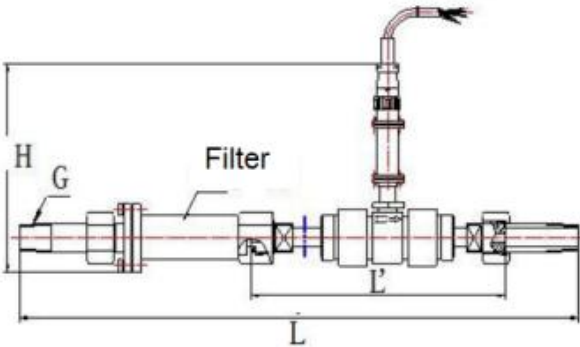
DN4~DN10 threaded connection flowmeter structure and installation dimensions
